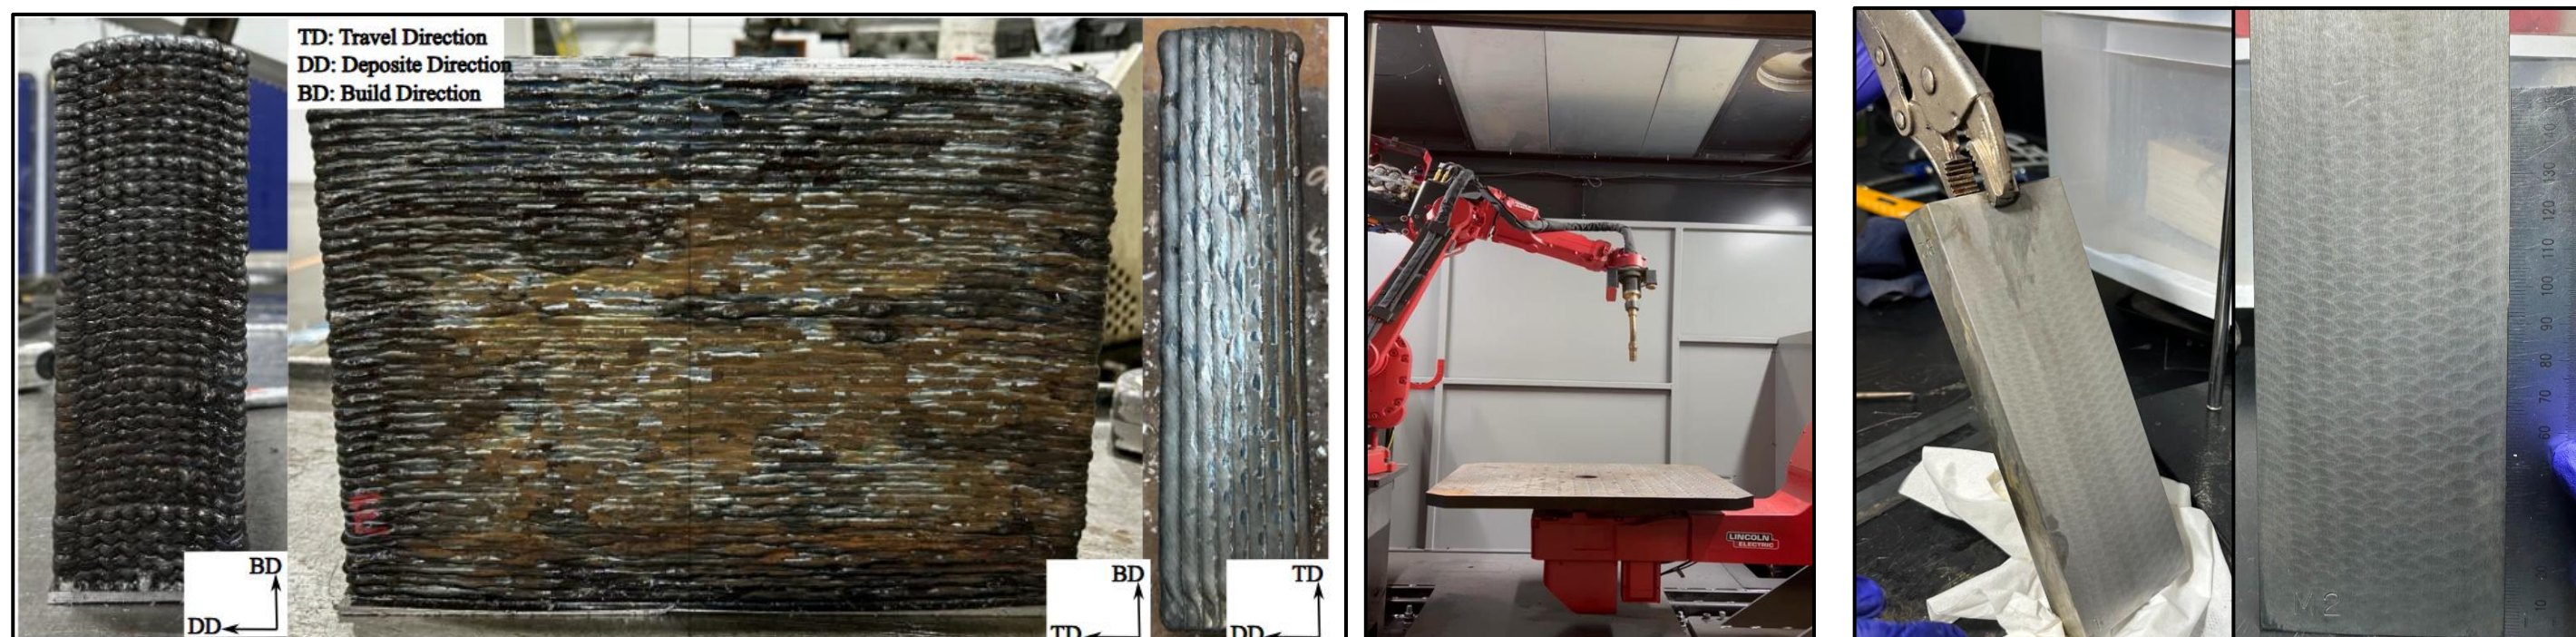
Thick Wall printed using the Lincoln electric WAAM Machine and macroetched surfaces.
